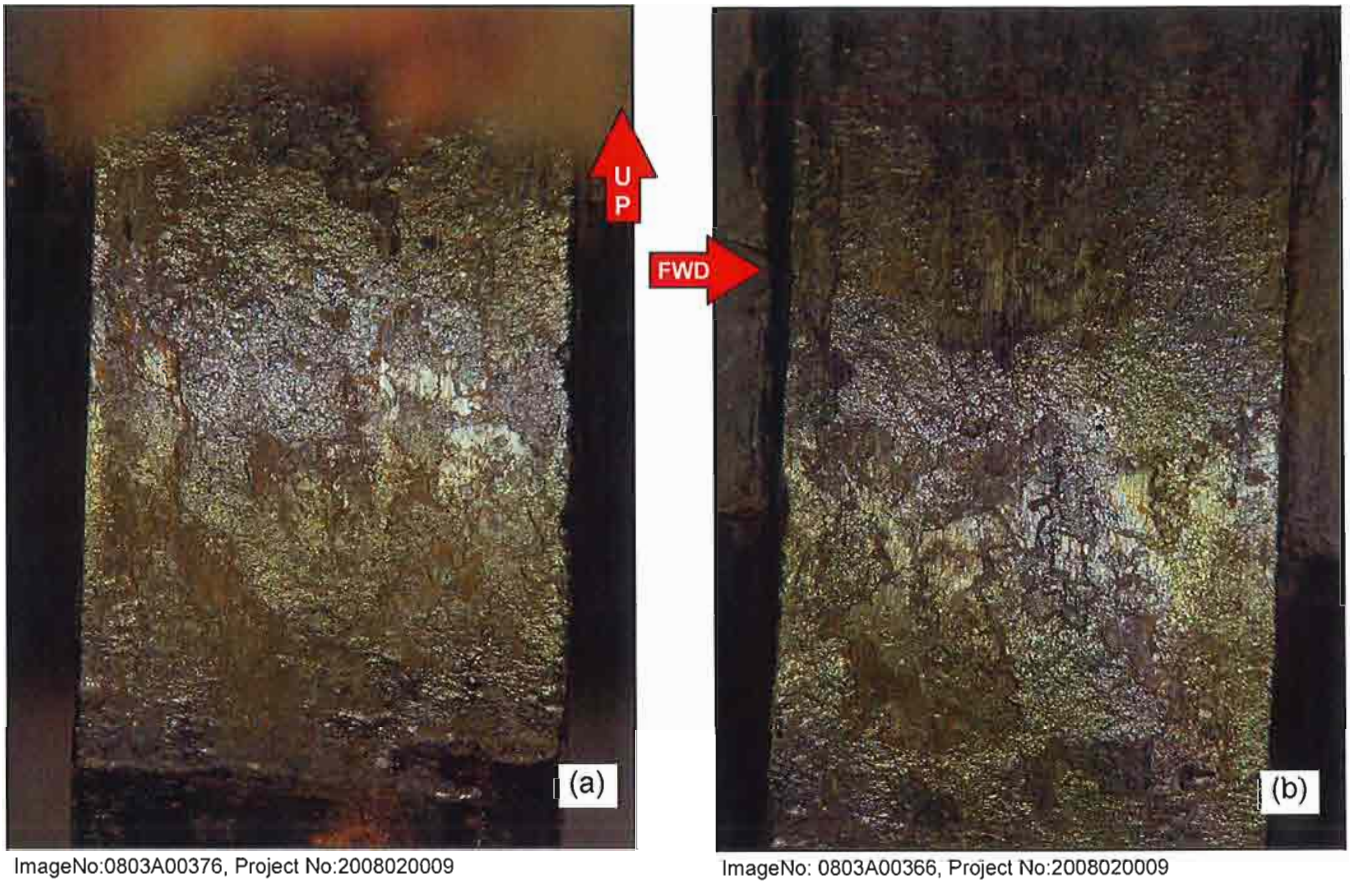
The bore surfaces of the forward (a) and aft fittings showing extensive surface corrosion with little original surface remaining.
